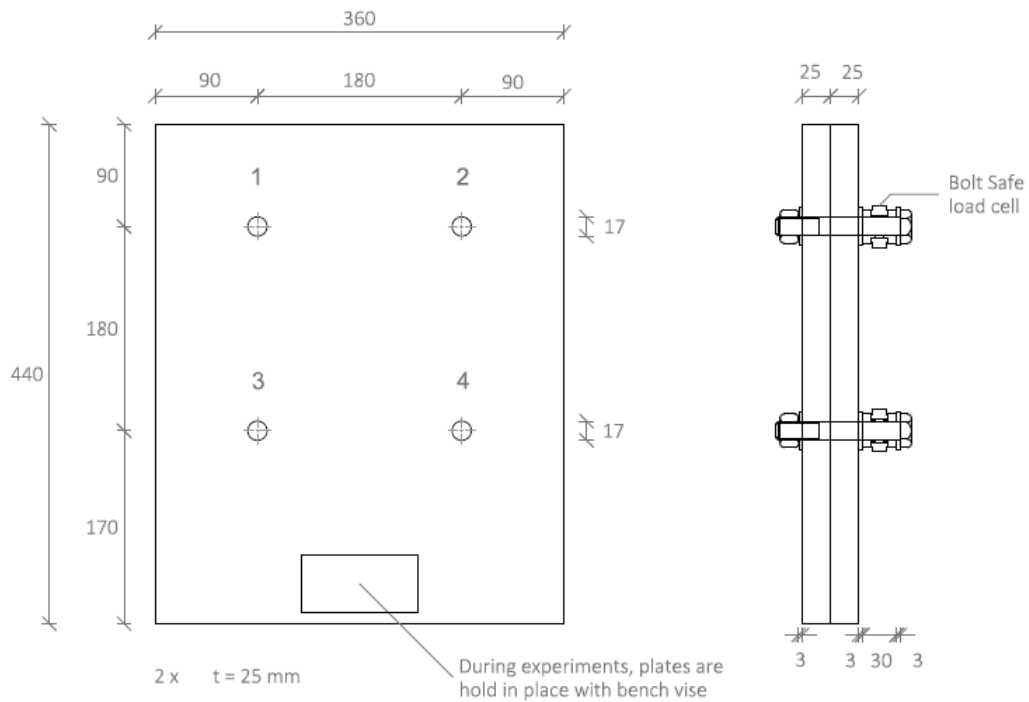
Test setup and joint dimensions including A4 80 M16 x 110 bolts
